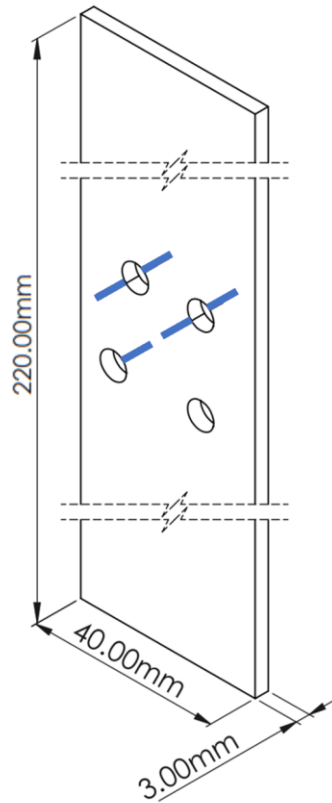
Multiple flaw specimen geometry and crack configuration.
